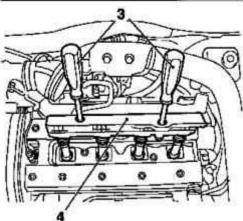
Components shooting in dismantling the ignition module: 1 - ignition module cover, 2 - wiring harness connector ignition module, 3 - a special tool, 4 - ignition module
